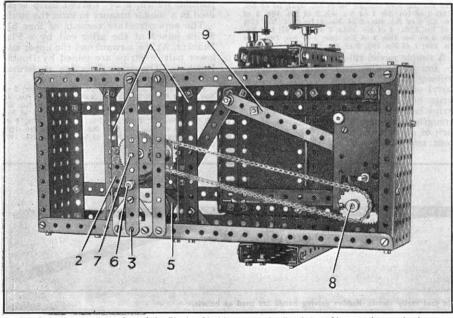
This underneath view of the Planing Machine shows details of the table operating mechanism.
